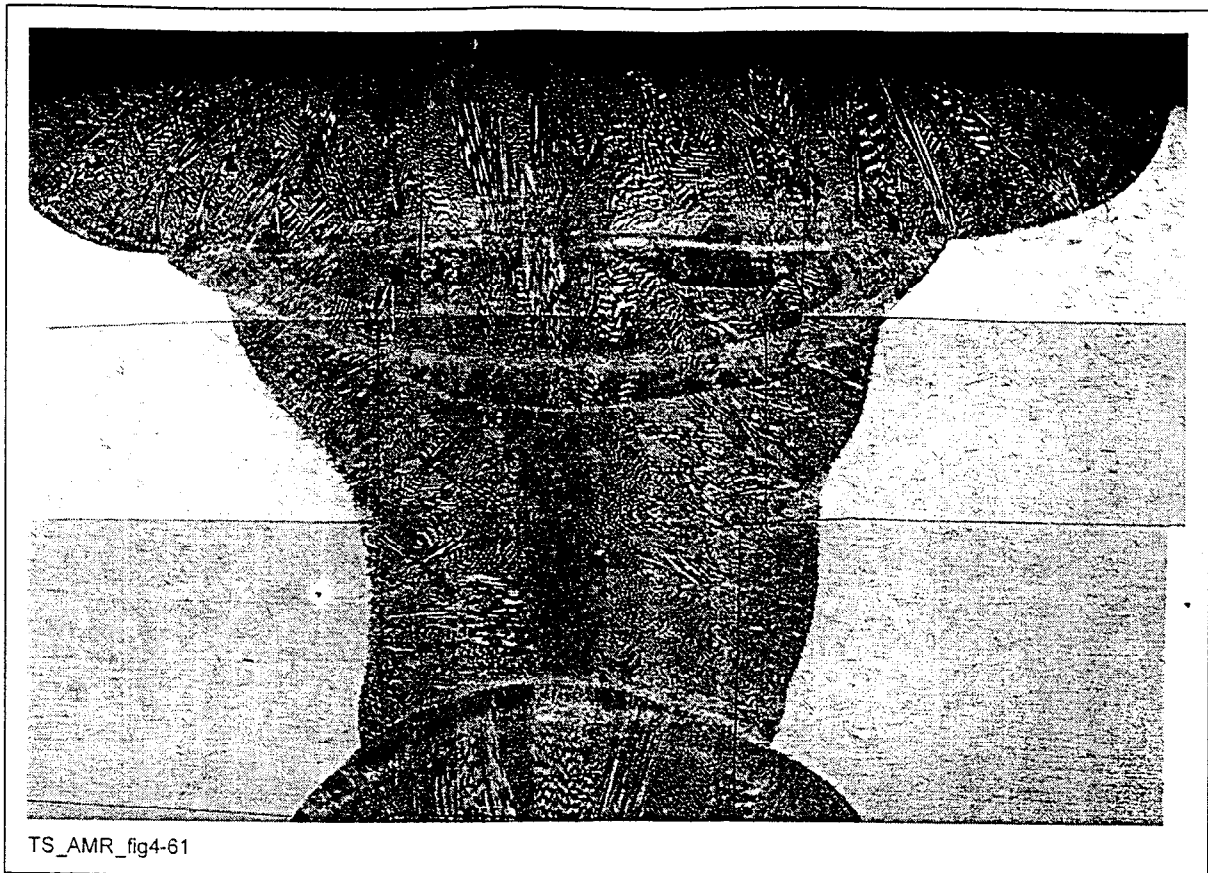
Low-Magnification Optical Micrograph of an Alloy 22 Multipass, Double-V Gas-Tungsten-Arc-Welding (GTAW) Weld with Matching Filler Metal
